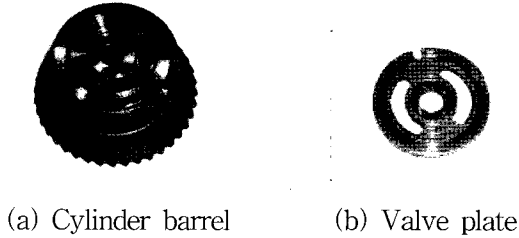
Contact surfaces of cylinder barrel and valve plate
